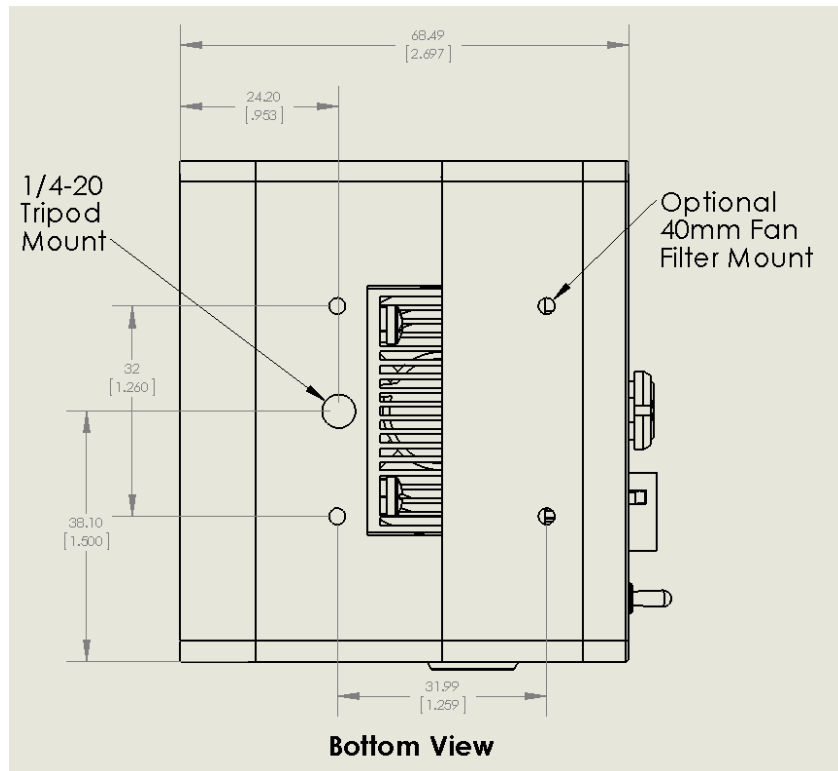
Dual Camera Link Body with Tripod Mount – Bottom View
